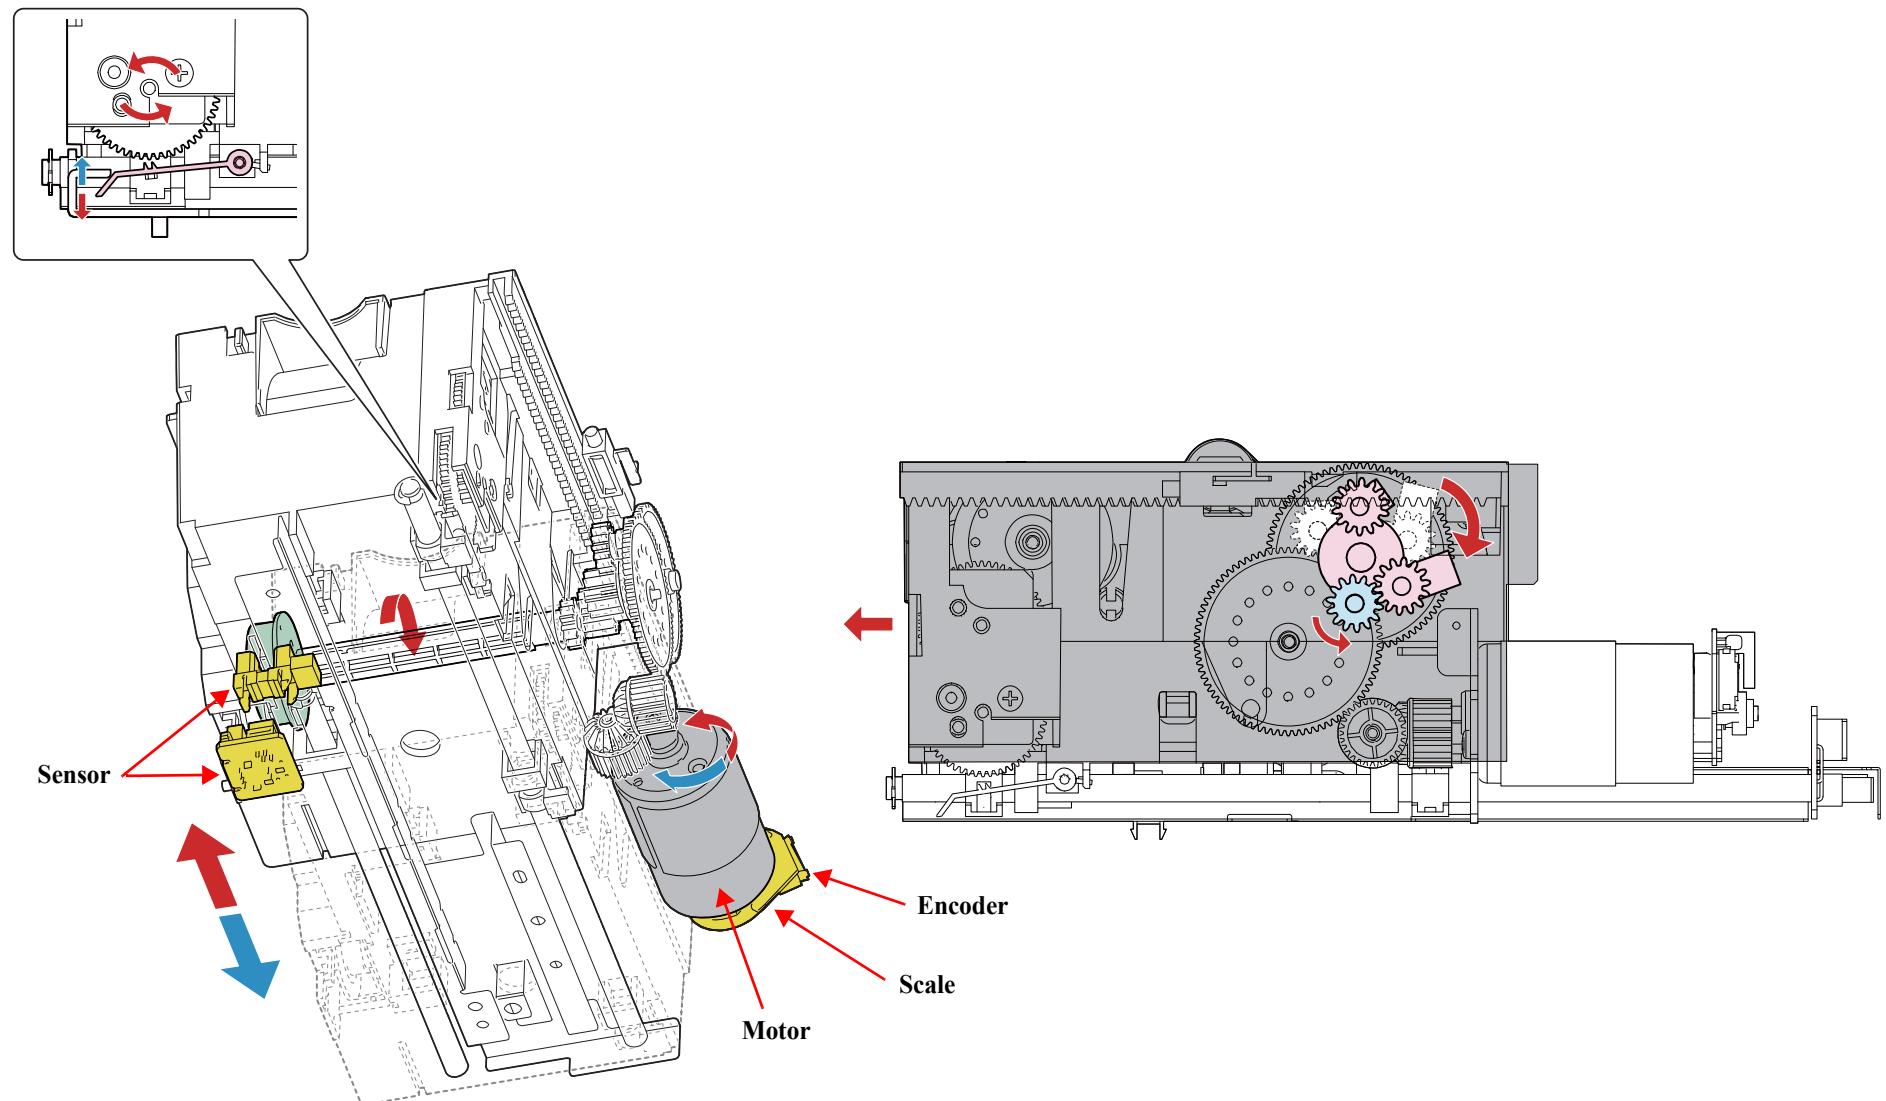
Ink System Mechanism (Cloth wiper assy)
